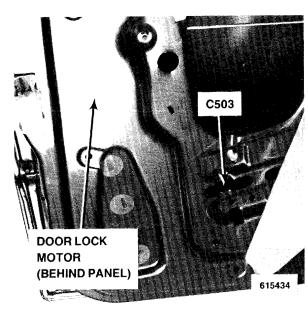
Inside Rear of LH Front Door (RH Similar)
